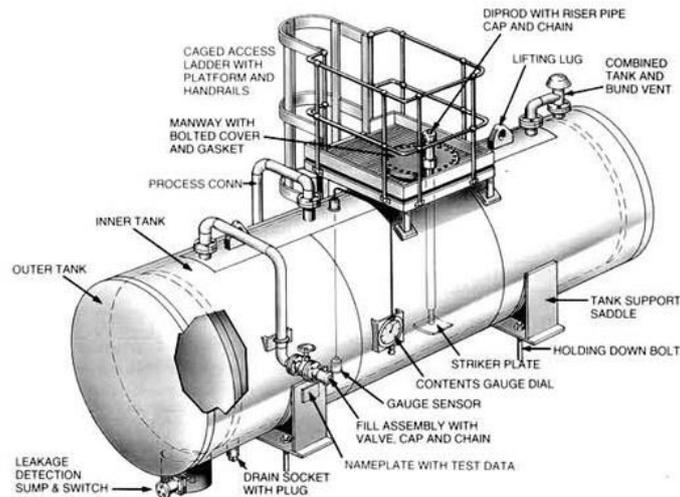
Typical Arrangement of Above-Ground Horizontal Tank
